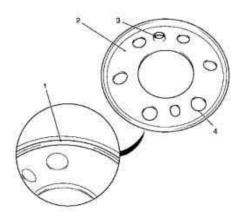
Encoder: 1 - magnetized path coding device; 2 - encoder, 3 - hole for precise positioning of the encoder on the crankshaft, 4 - holes for the mounting bolts flywheel
